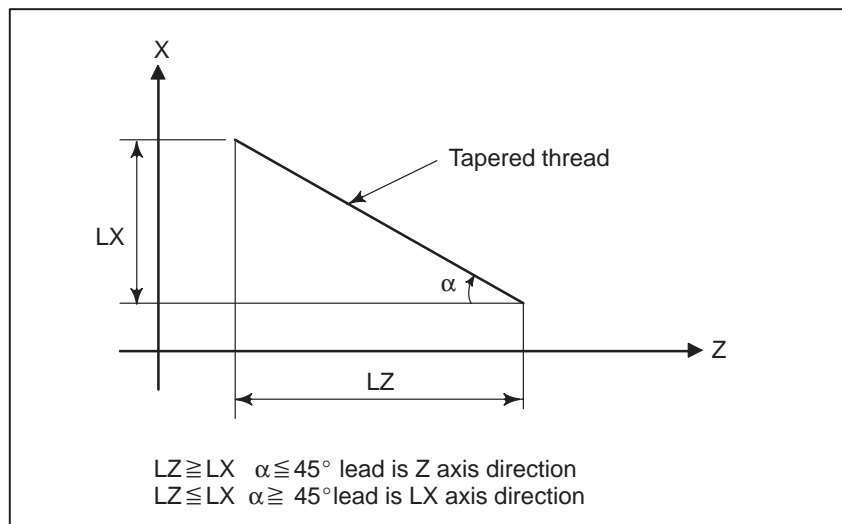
(e) LZ and LX of a Tapered Thread
